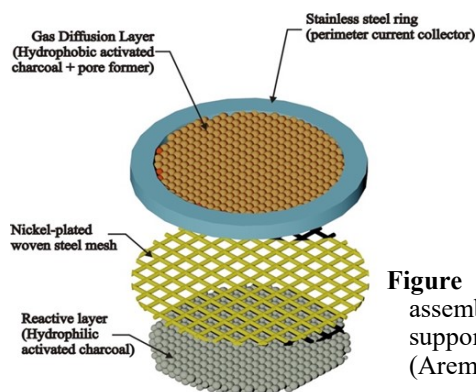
Exploded assembly of a mesh-supported GDE (Arema, 2012)
